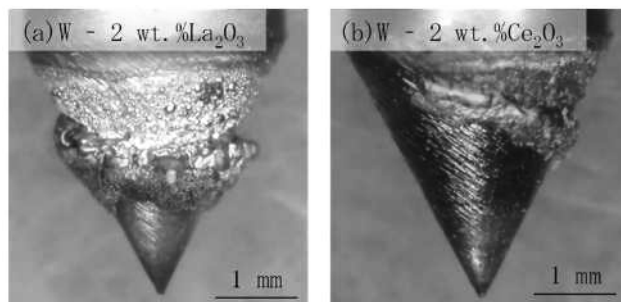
Photographs of tungsten electrode tip after welding for 60 seconds.
